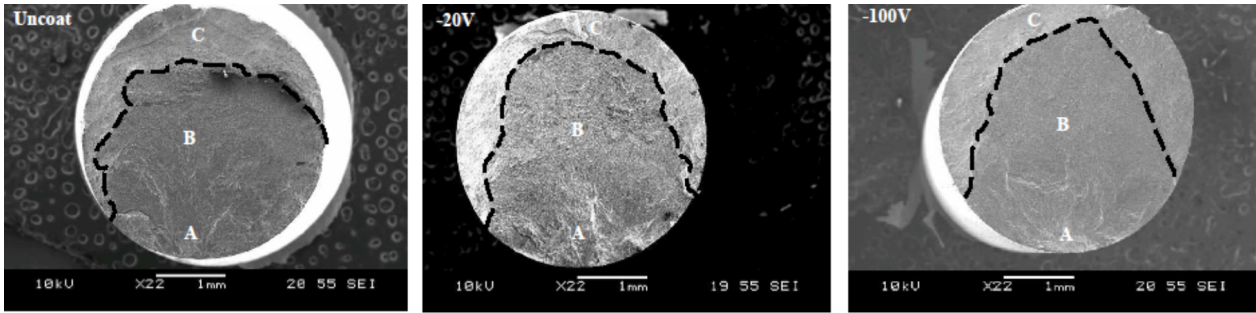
Overall fracture surface view of the uncoated specimen and the coated specimens deposited under -20V and -100V. The marks A, B and C represent crack initiation region, crack propagation region and final fracture region, respectively.
